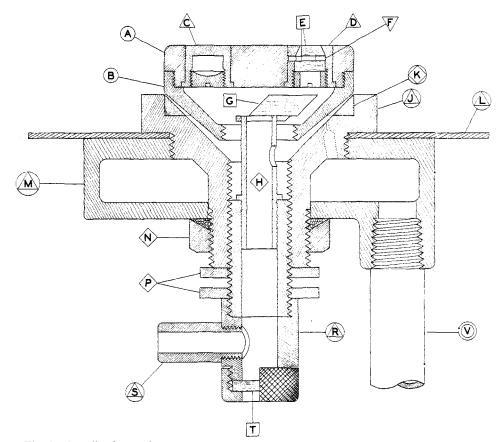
Details of rotor (second type described in text), stator, and periscope: A, cell-holder; B. rotor cone; C, dummy cell; D, cell; E, quartz disks; F, hard rubber separator G, periscope prism; H, periscope tube; J, stator; K, bronze insert; L, disk to which baffle strips are fastened; M, manifold; N, packing nut; P, lock-nuts; R, holder for central air inlet and window; S, connection to central air inlet; T, window; V. high pressure supply tube. The symbols indicate the materials of construction:  $\bigcirc$ , Republic Steel Corporation's UMA 4, hardened and ground;  $\triangle$ , Monel Metal;  $\Box$ , quartz;  $\nabla$ , hard rubber;  $\diamondsuit$ , brass;  $\bigcirc \triangle$ . duralumin (17ST);  $\bigcirc \diamondsuit$ . bronze; o, aluminum.
